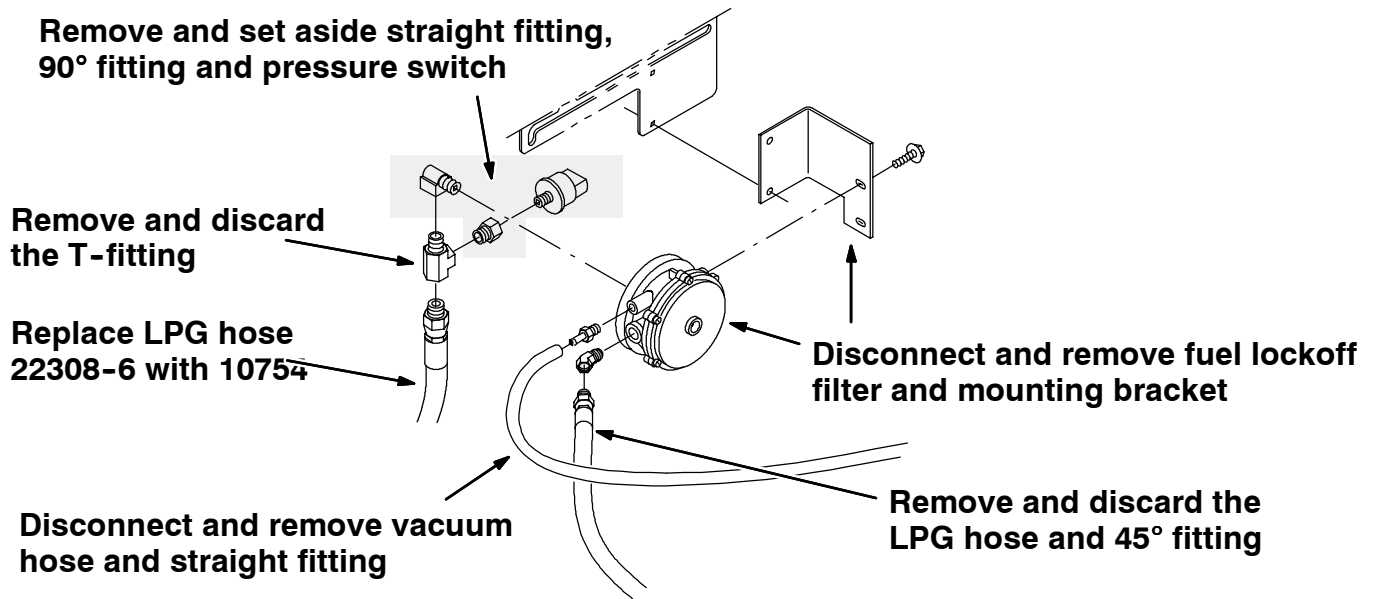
REMOVAL, OLD LPG FUEL LOCKOFF FILTER
